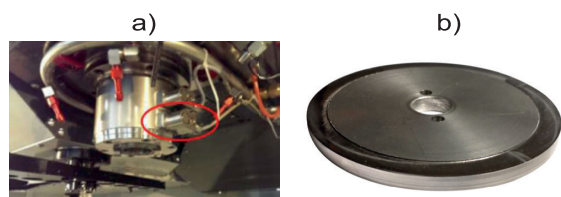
a) - CNC spindle and acceleration sensor mounted on the lower bearing of the spindle [26], b) - exemplary in-conel disc.
